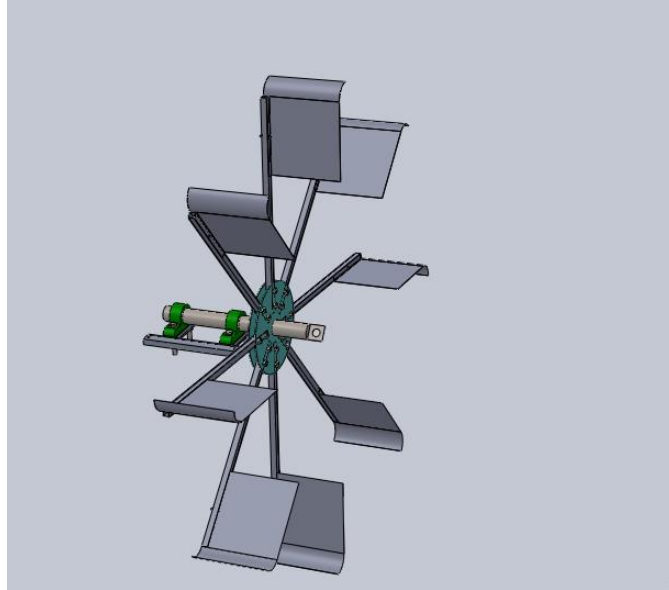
3D model of experimental prototype of spiral pump water wheel
